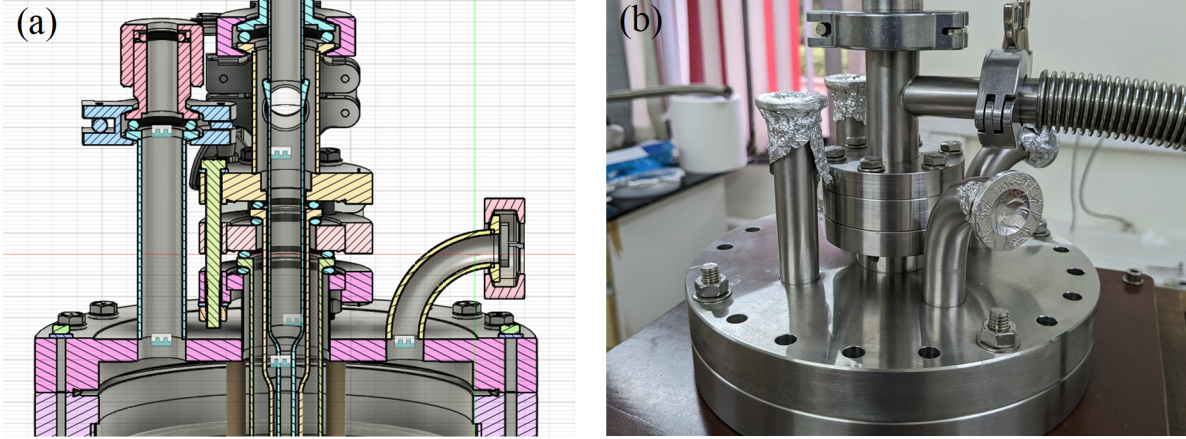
(a) Setup to hold primary coil and secondary coil glass tubes between two o-rings
